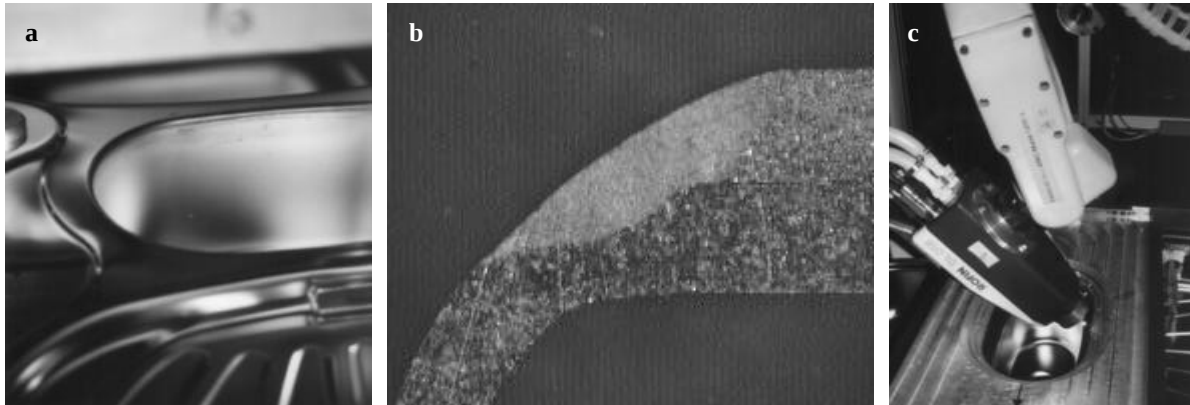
Welding of kitchen sink with high power diode laser [20]. a: kitchen sink after welding (before polishing); b: cross section of a weld seam; c: positioning of laser head with the robot;
